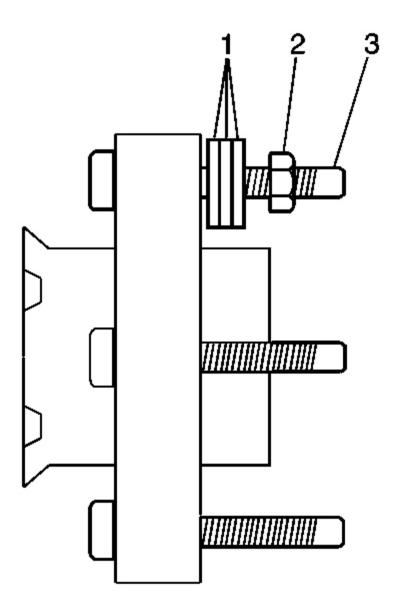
Wheel Nut, Wheel Stud & Washers Courtesy of GENERAL MOTORS CORP.
